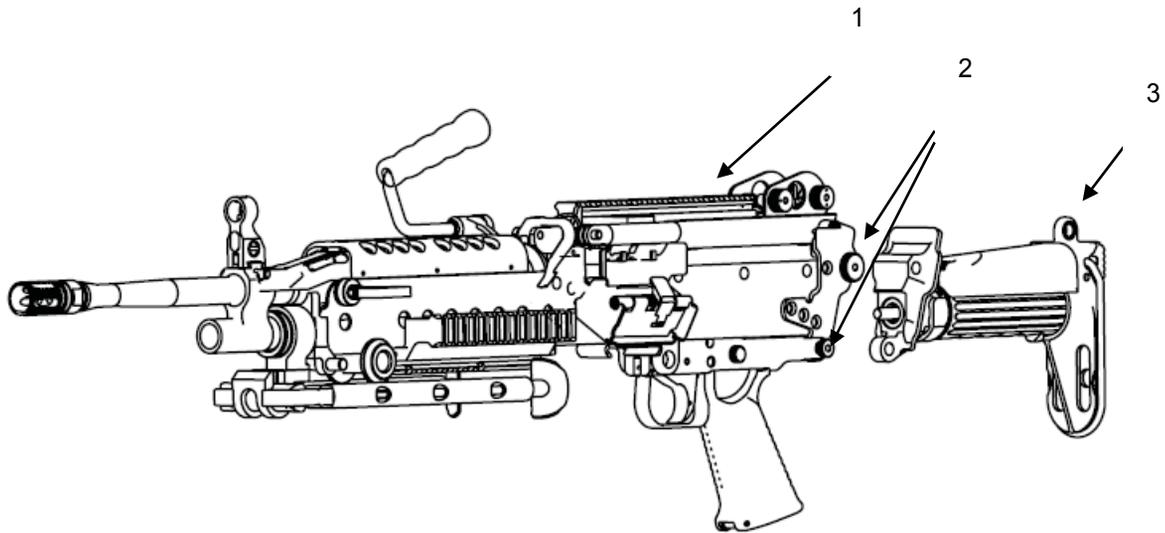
Lightweight Collapsible Buttstock Assembly Removal.
